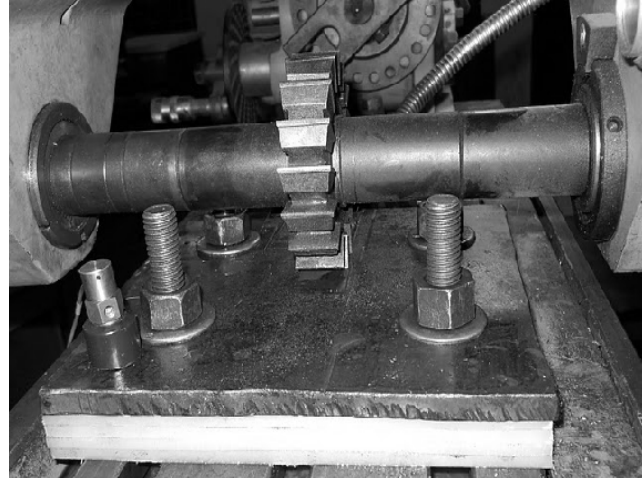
Milling machine with 5 layers of reinforced composites sheets bolted to slotted table
